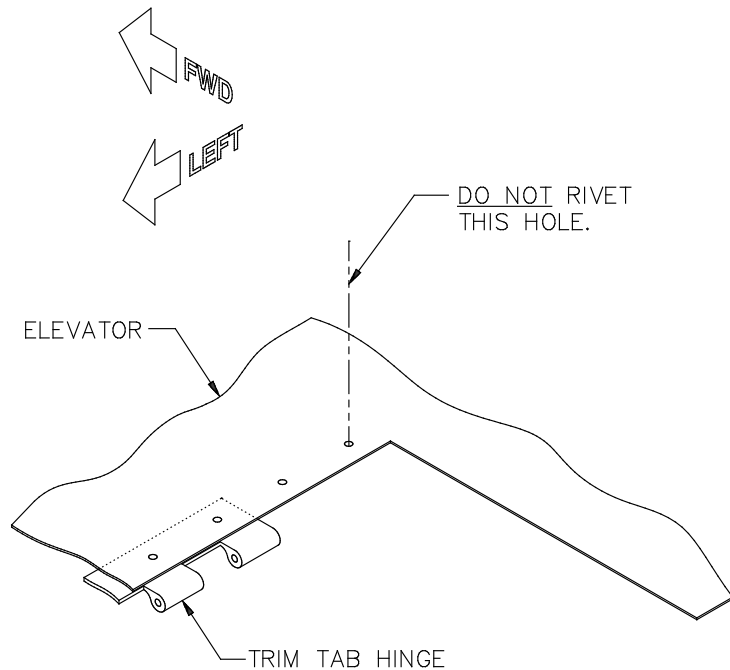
Elevator-Side, Hingeline Rivet Holes to Be Left Empty
